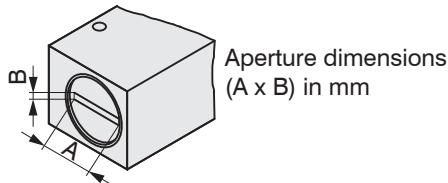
Dimensional drawing ODC 1200, ranges 2/5/10/16 mm, dimensions in mm
